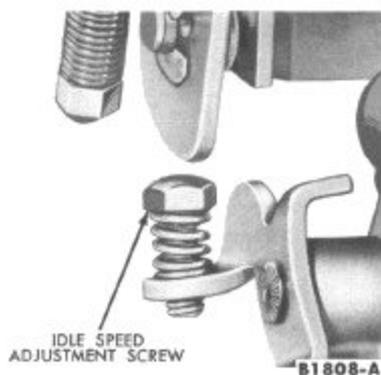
Ford Single-Barrel Idle Speed Adjustment
